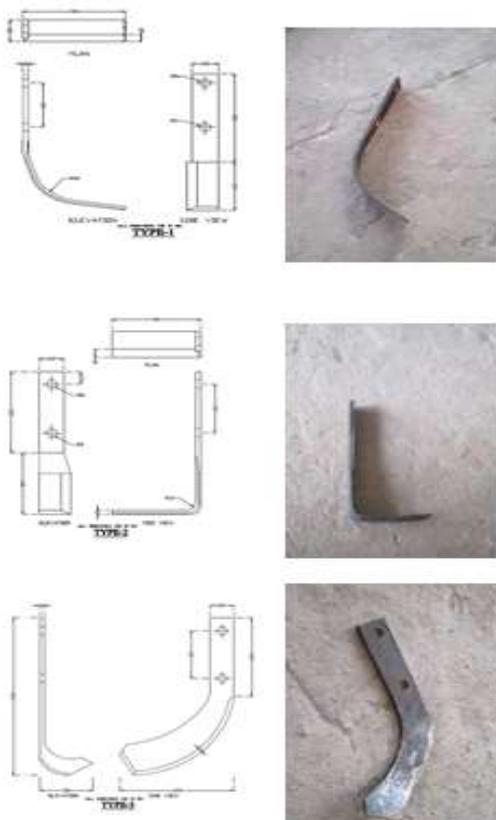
Type of blades (a) C type blade (b) L type blade (c) Hatchet type blade
